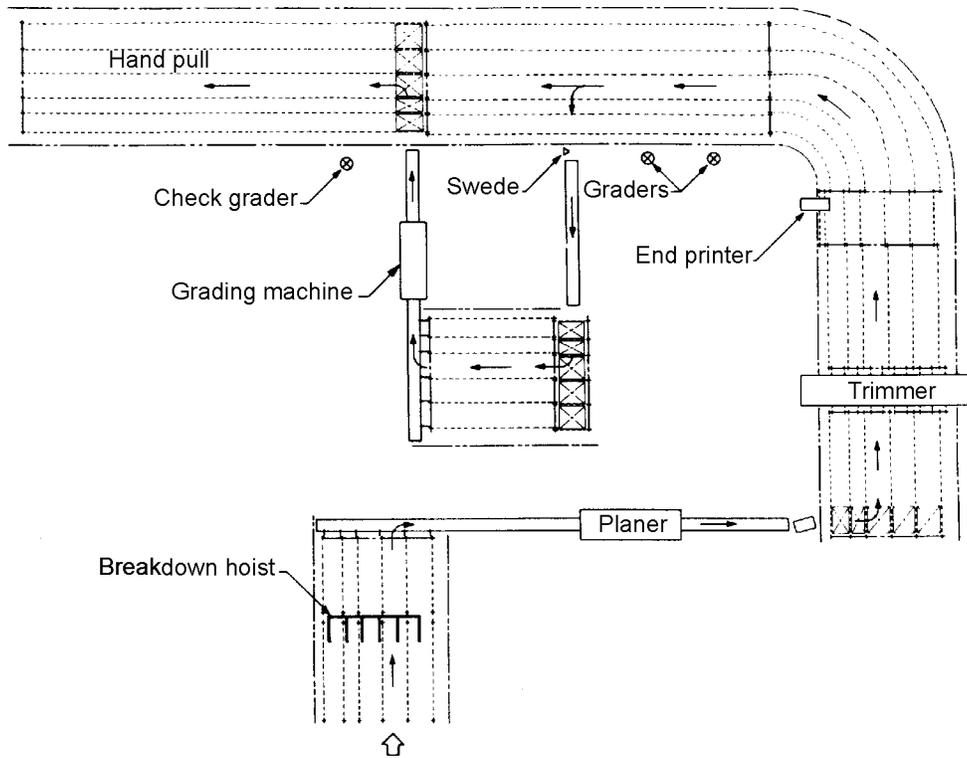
Planing mill arrangement in which graders hand-select pieces to be routed by swede to grading machine.
